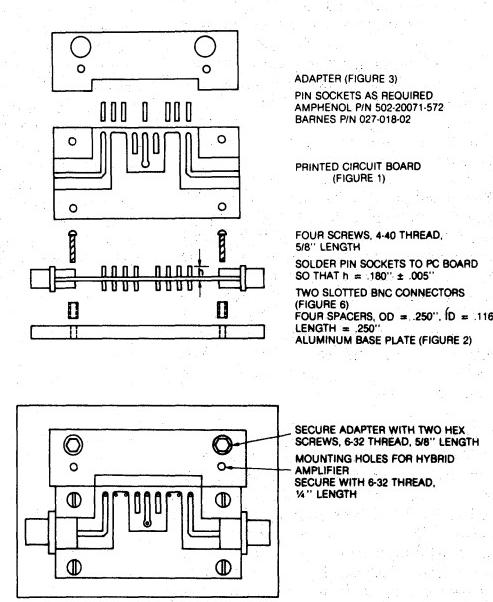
Test Fixture Assembly for Hybrid Amplifiers in Hermetic Package (Case 826-01)
